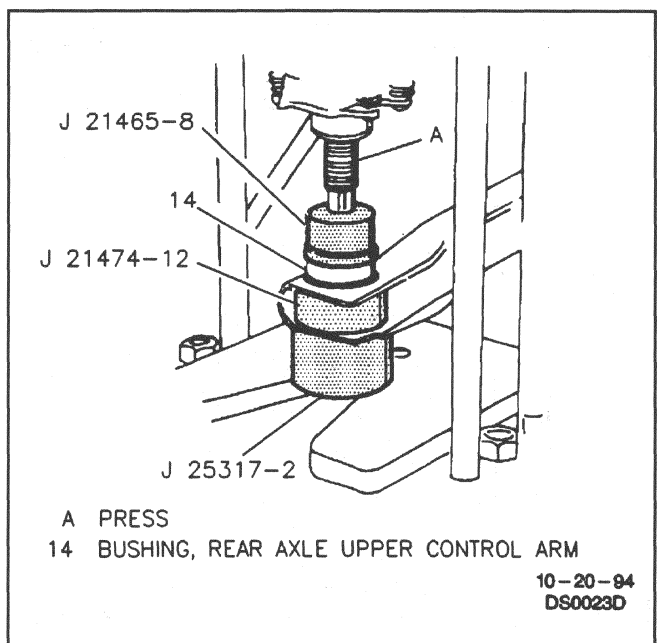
Removing Rear Axle Upper and Lower Control Arm Bushings (Typical)
